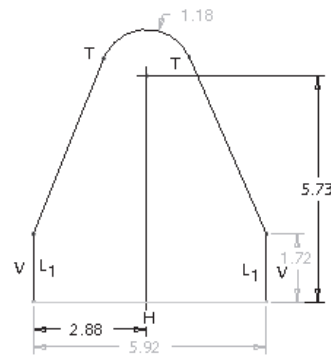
Sketch with all entities, weak dimensions, and weak constraints
